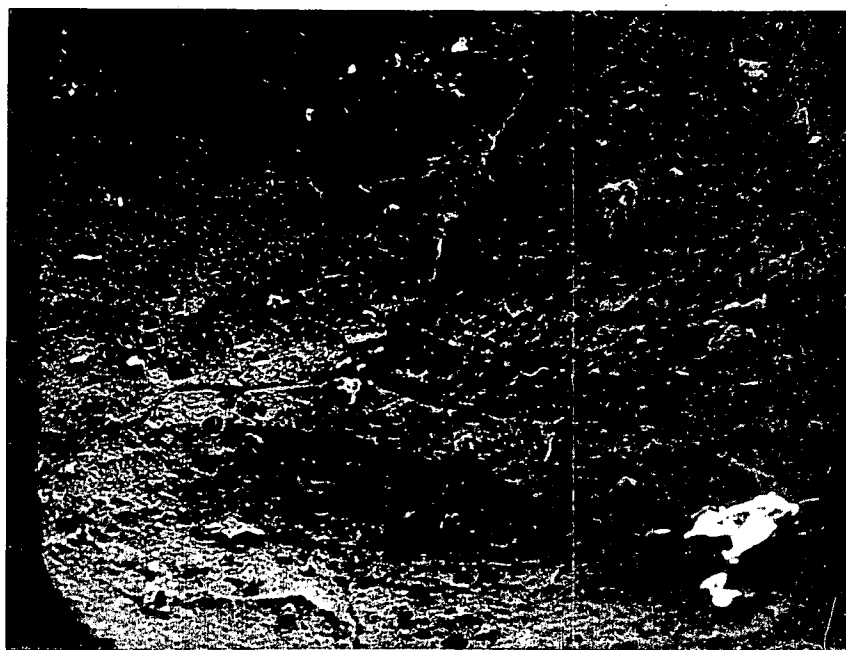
Trailing edge crack fracture surface and freshly fractured area of the second-stage nozzle (magnification 500X)
